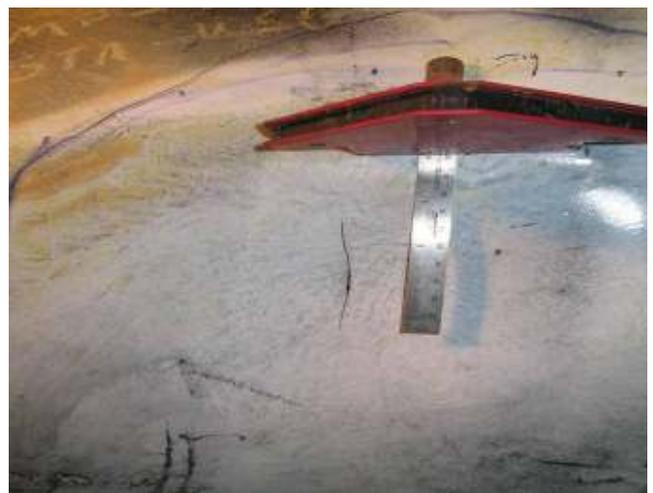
Photo of a large crack inside a dent identified by an MFL Inspection tool
